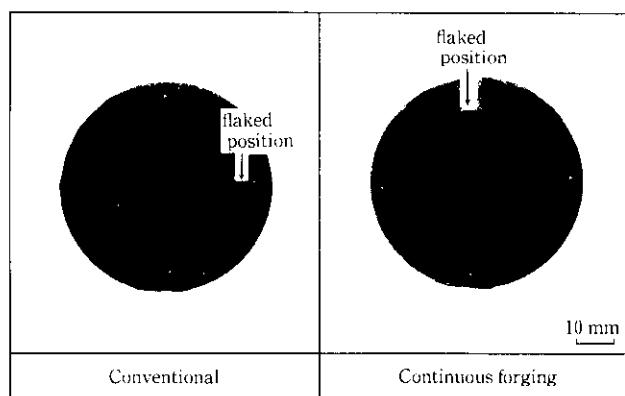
Macrostructure of test specimen after rolling-contact fatigue life test
